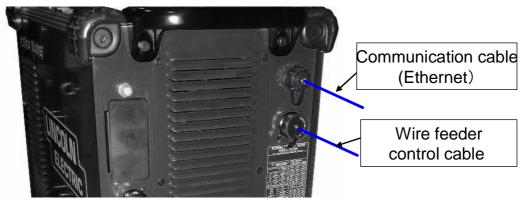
(p) Connection of ROBOWELD iC/H3 (Power Wave R350) (2/4)
